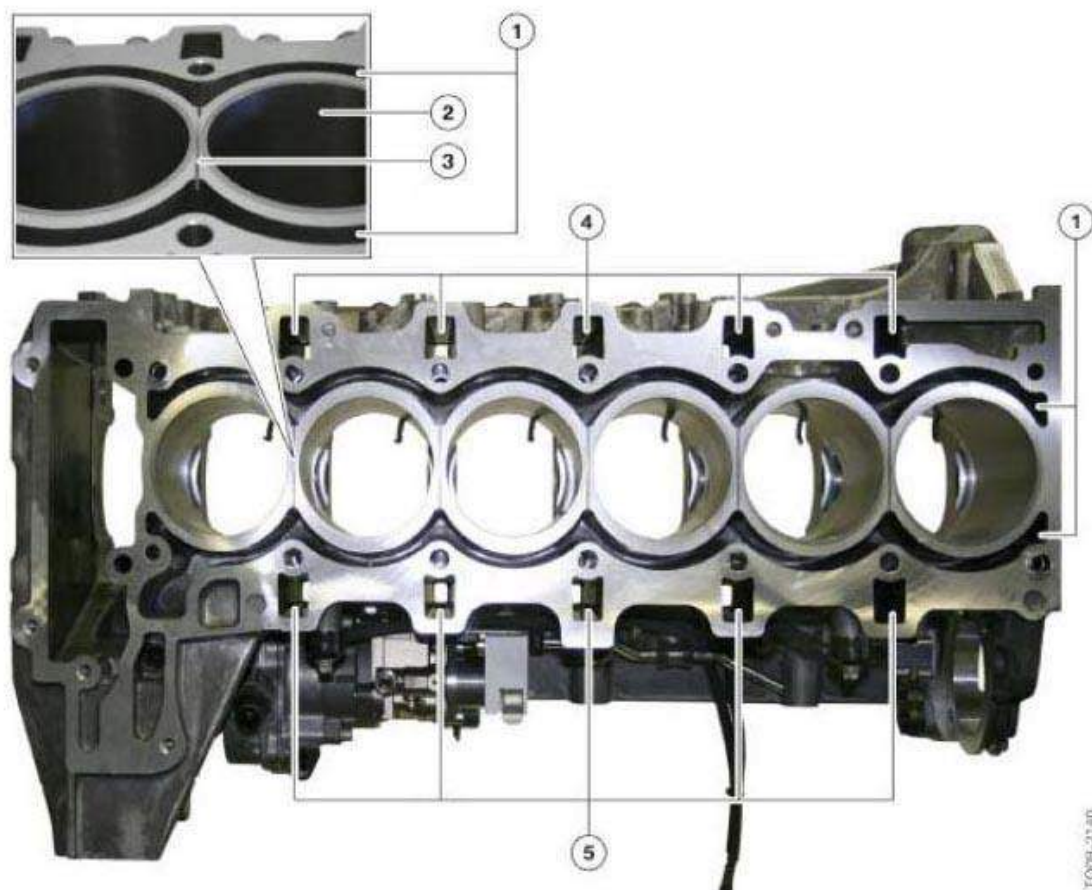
Identifying Coolant Passages And Web Cooling Of Engine Block -N55
